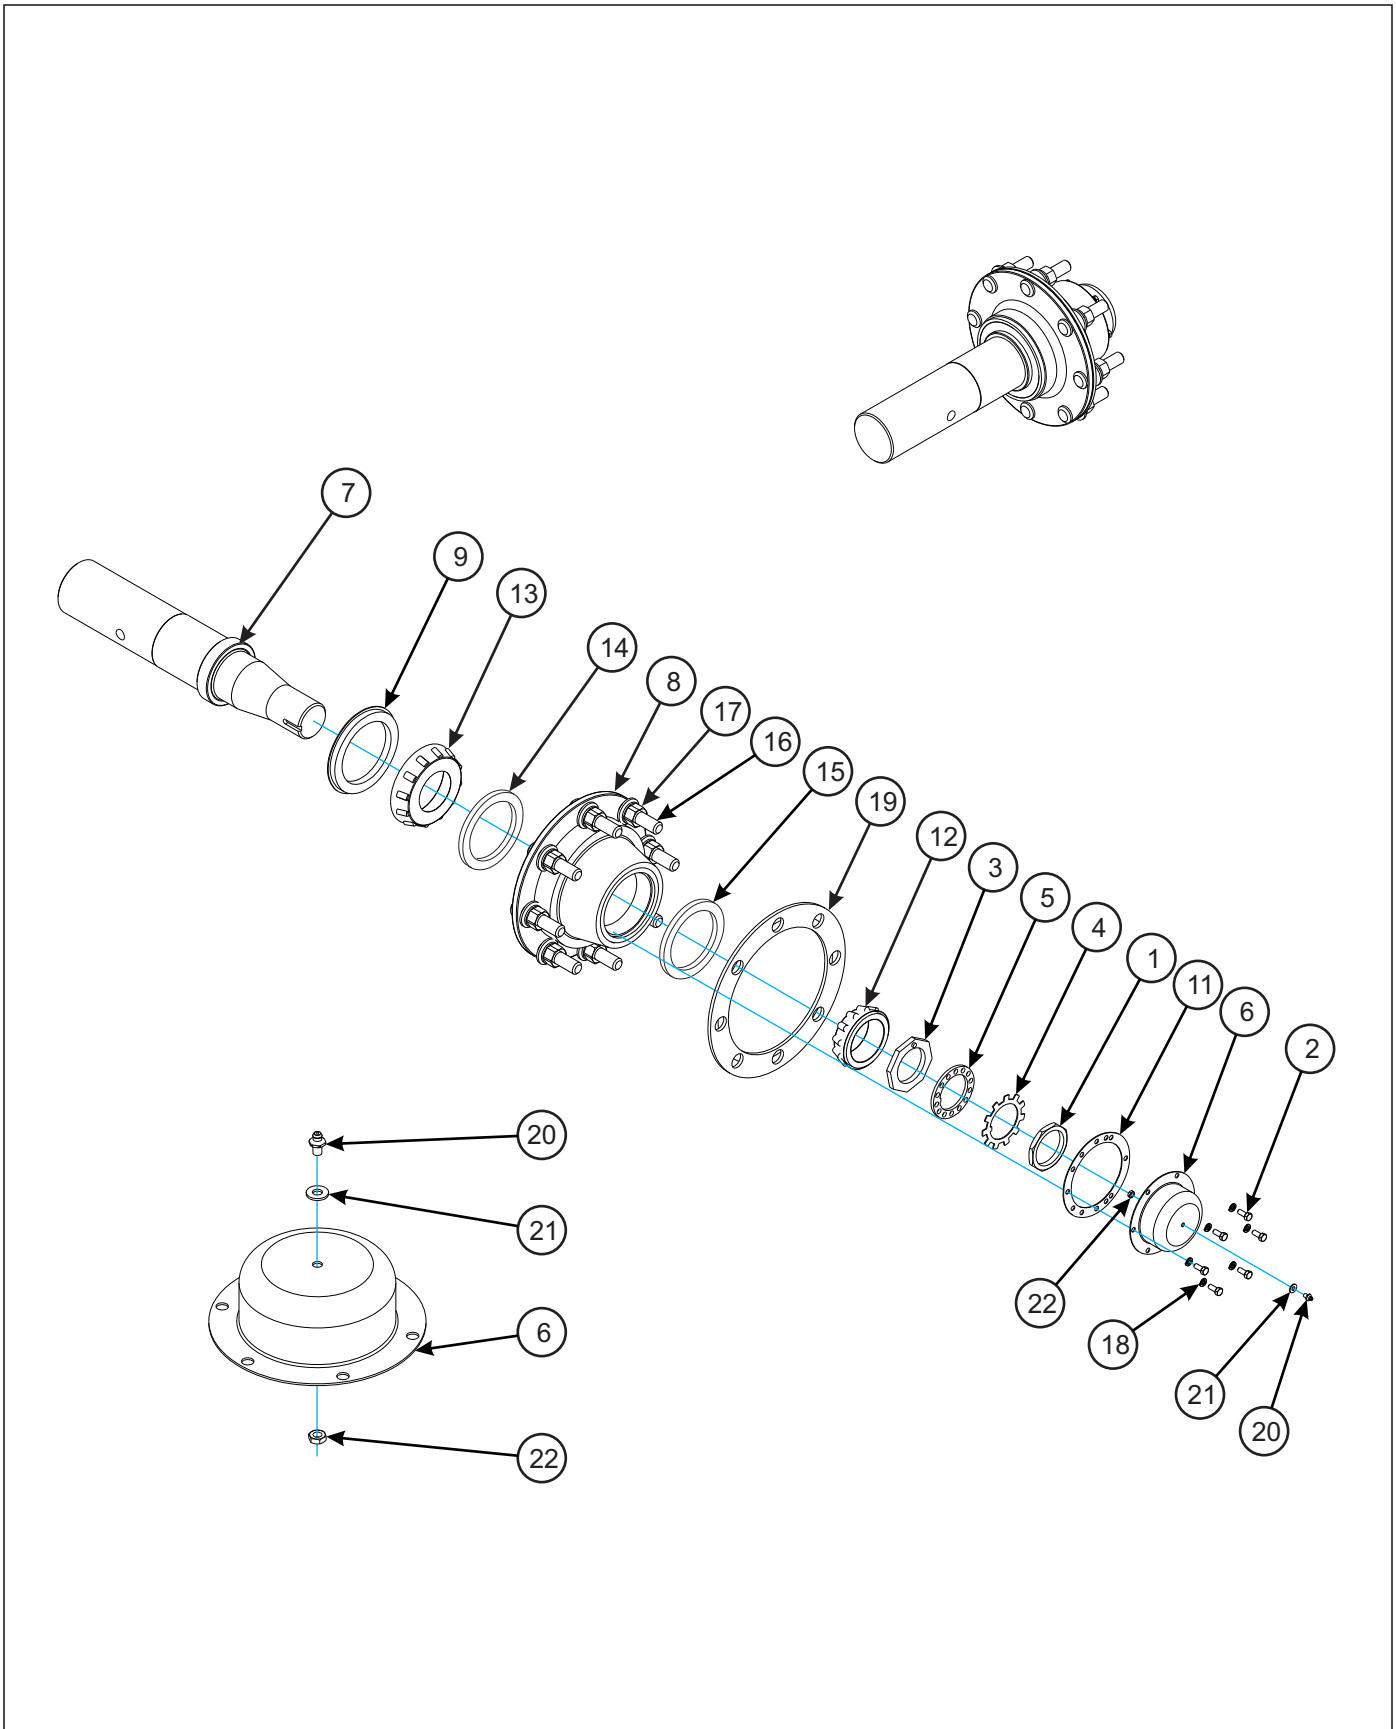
Hub/Spindle Assembly 191974 (Option)
